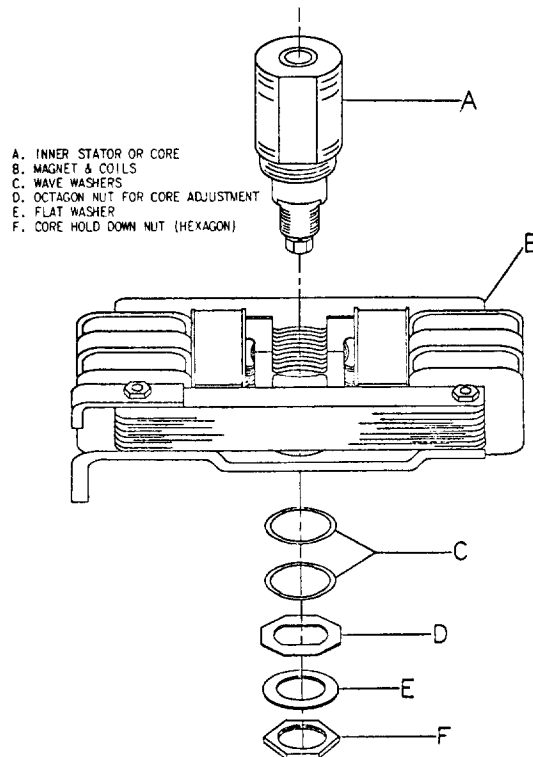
(0208A3583-0) Assembly Of Core And Associated Parts
